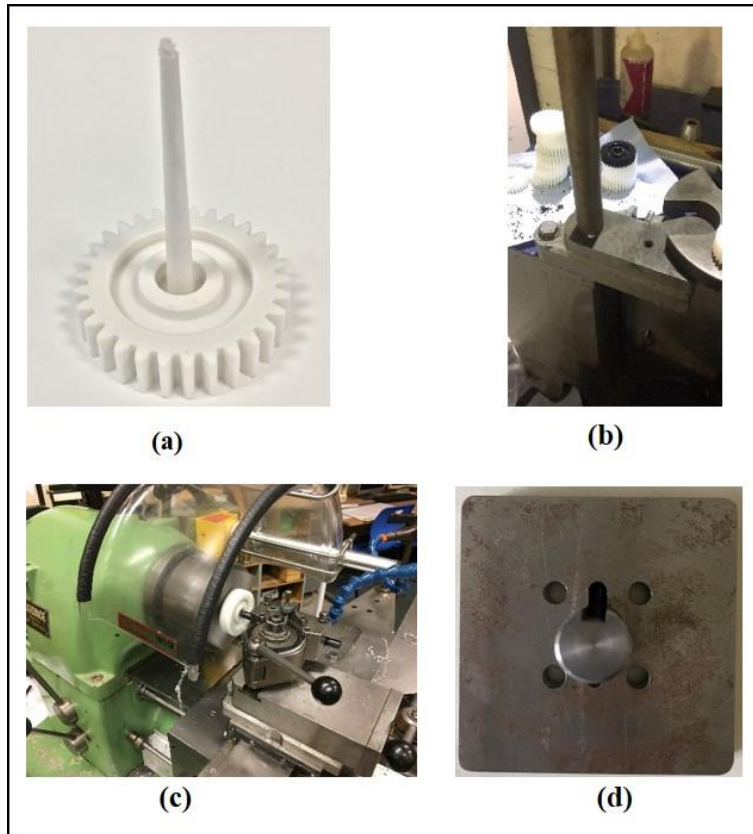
(a) manufactured gear sample. (b) press for gear modification. (c) cutting machine tool for gear modification. (d) clamp for gear modification.
